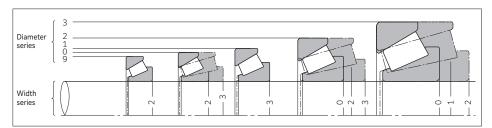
Dimension series for tapered roller bearings (based on JIS B 1534)
